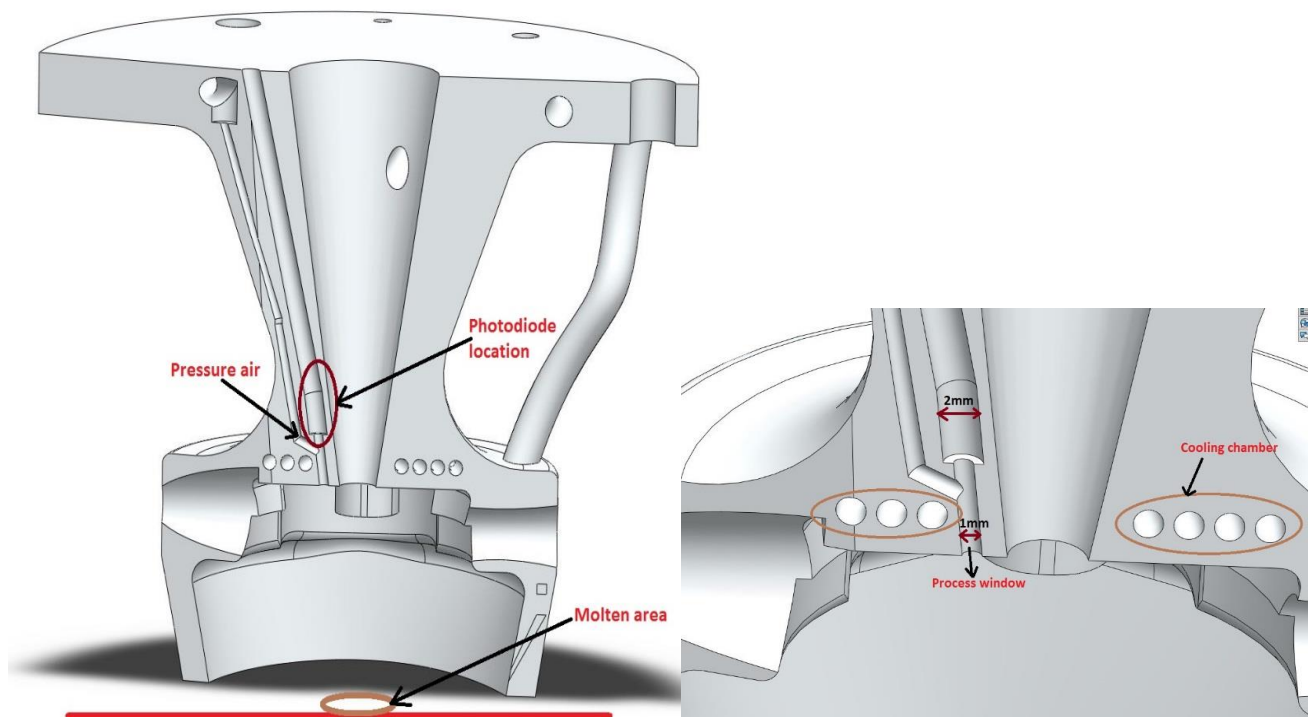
Photo diode tube and location in nozzle (left), process window and tube dimensions (right).
